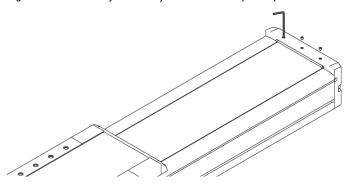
Disassembly/Assembly of the cover strip clamp
